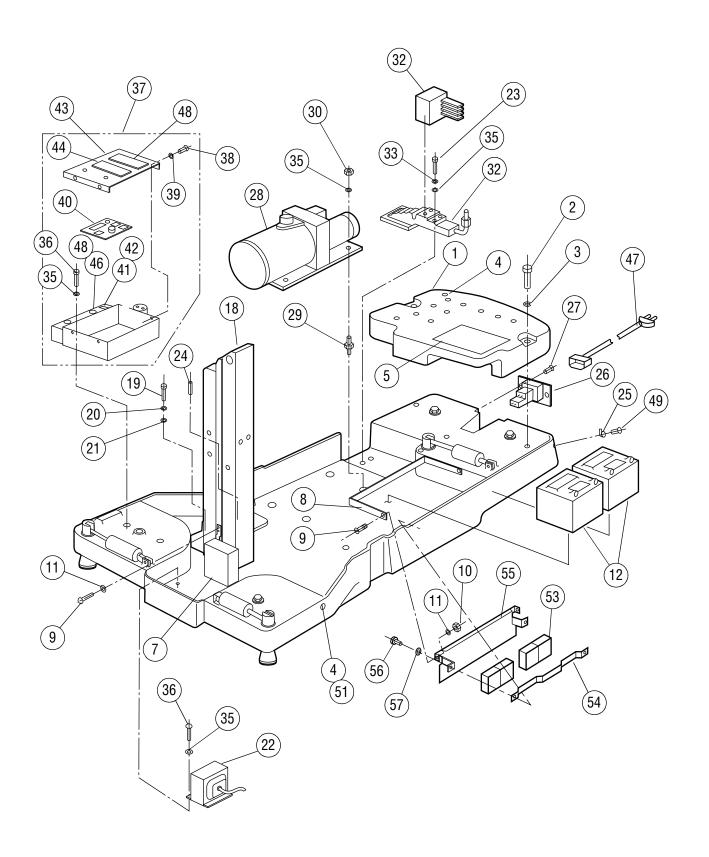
3085 SP (IPX4) Surgical Table Base Assembly, Components
